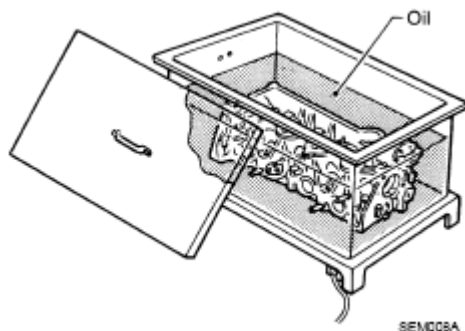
Heating Cylinder Head By Soaking In Heated Oil
